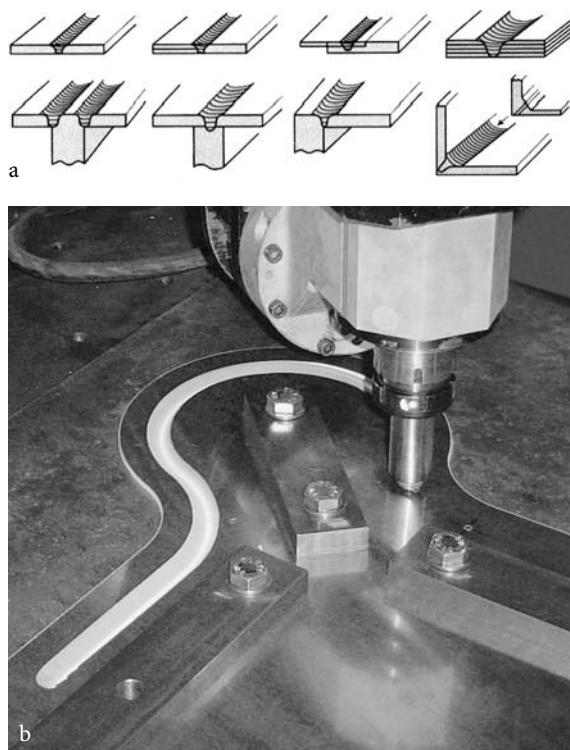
Possible FSW joint configurations (a) experimental set-up for Robotic FSW (b) [26]
